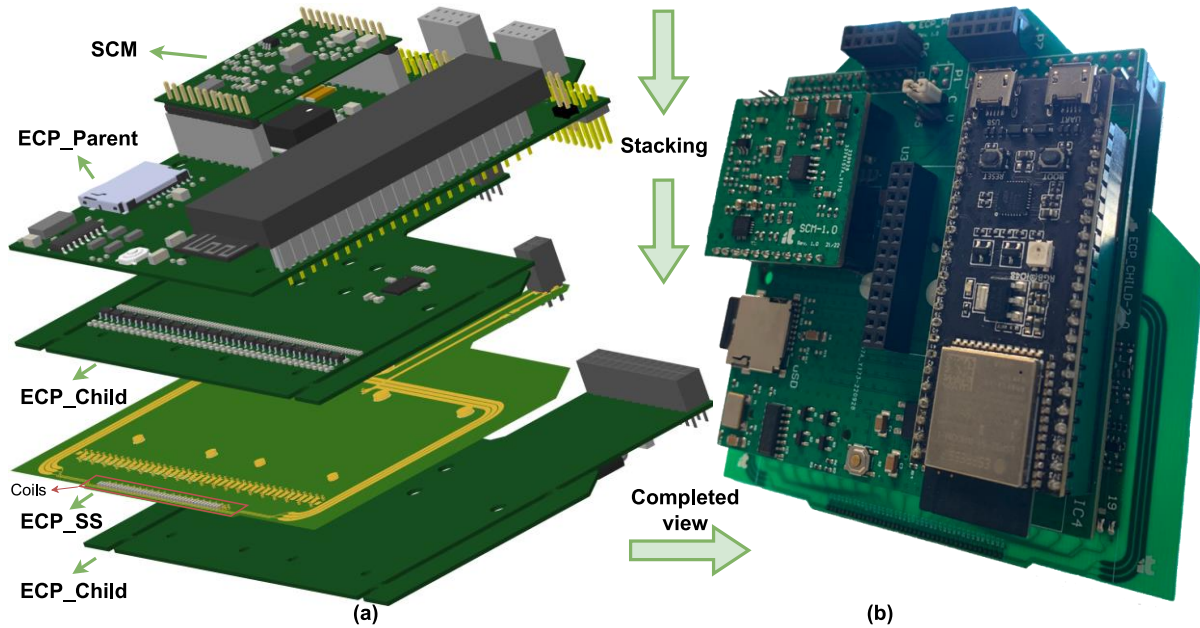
WECAP PCB stackup (a) and WECAP real PCB view (b).
